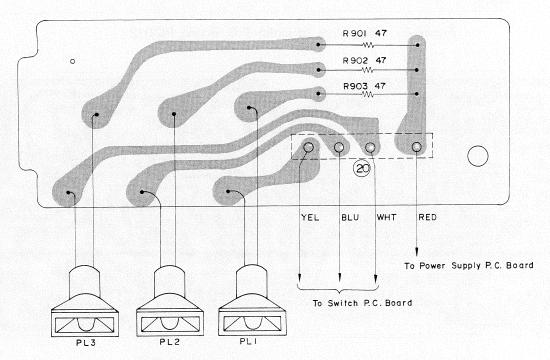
Bottom View of Lamp P.C. Board, PC-010
